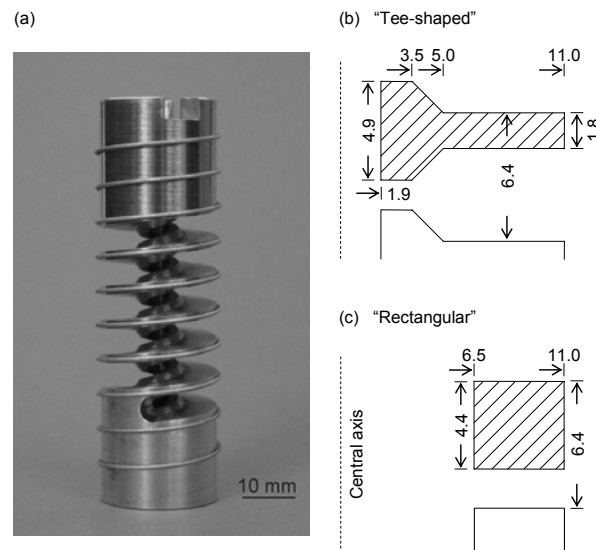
(a) Photograph of a superconducting wire mounted on a tee-shaped spring; (b) and (c) sections through turns of the tee-shaped and rectangular springs showing radial and axial dimensions in mm.
